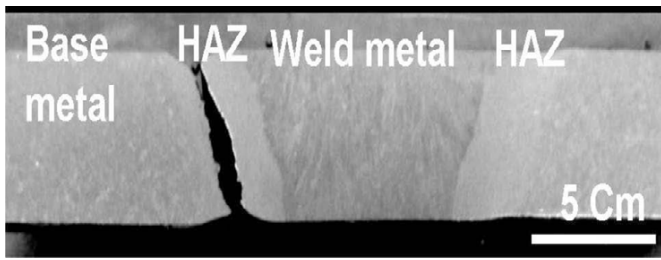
Typical type IV failure at the outer edge of HAZ in G91 weld joint specimen tested at 923 K and at 60 MPa for 1517 h [30].
